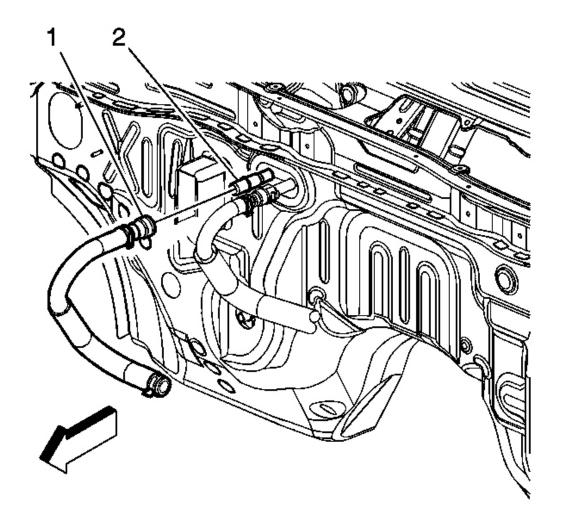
View Of Inlet Heater Hose Quick Connect Courtesy of GENERAL MOTORS CORP.
